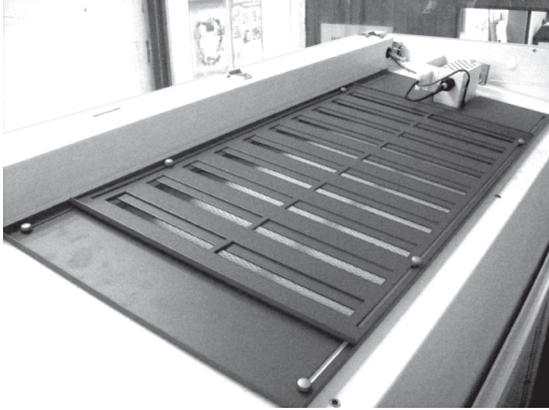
Secure bottom part with thumb screw first, then put the top part
